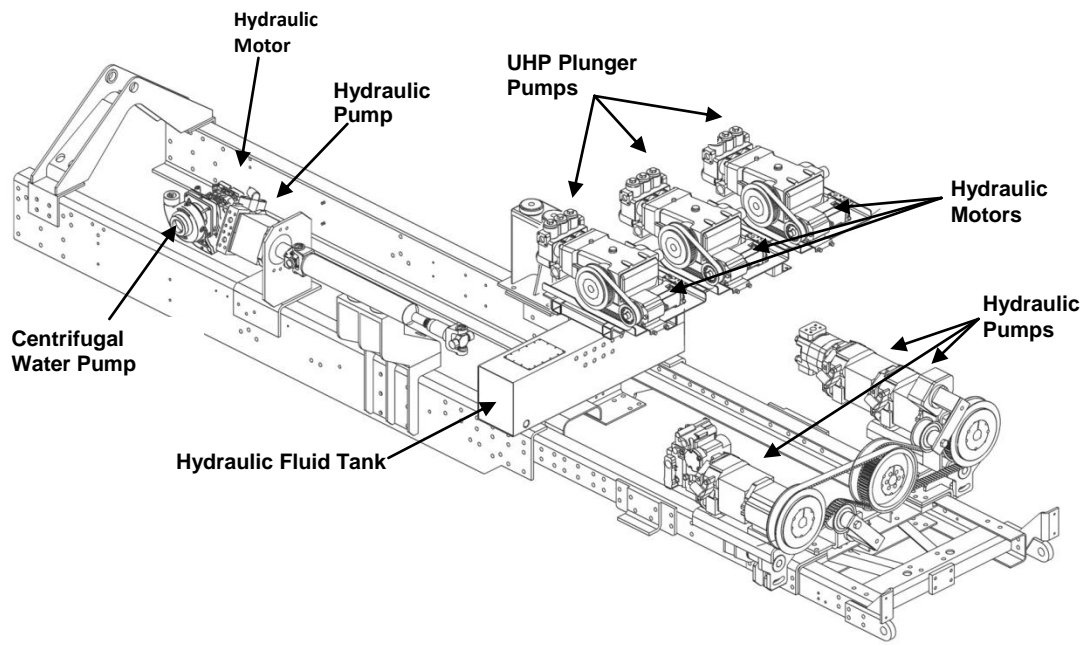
Pumping System and Hydraulic Drive for UHP P-19p
